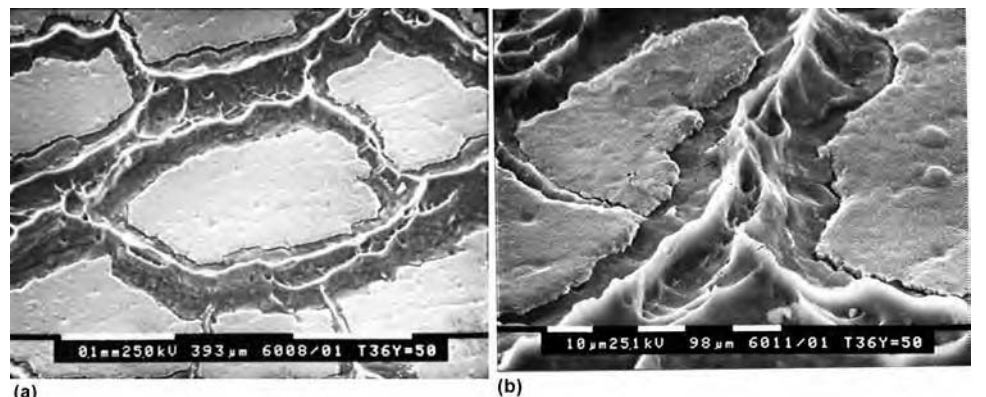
Weld interface surface after fracture of roll-bonded electroless nickel-plated aluminum-aluminum. Source: Ref 11
